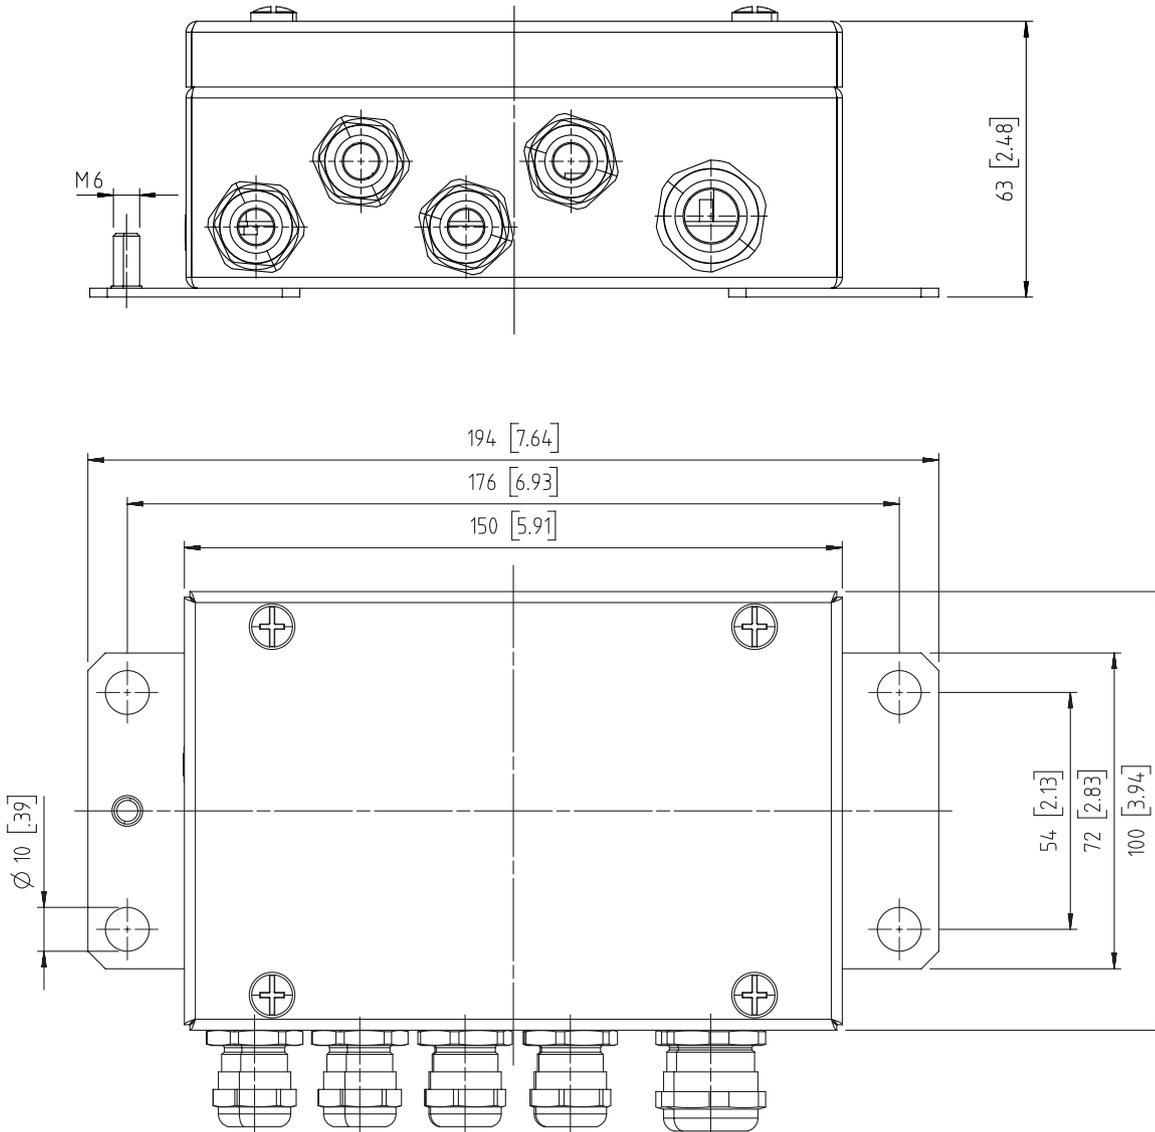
Dimension drawing stainless steel enclosure, dimensions in mm [inch]
